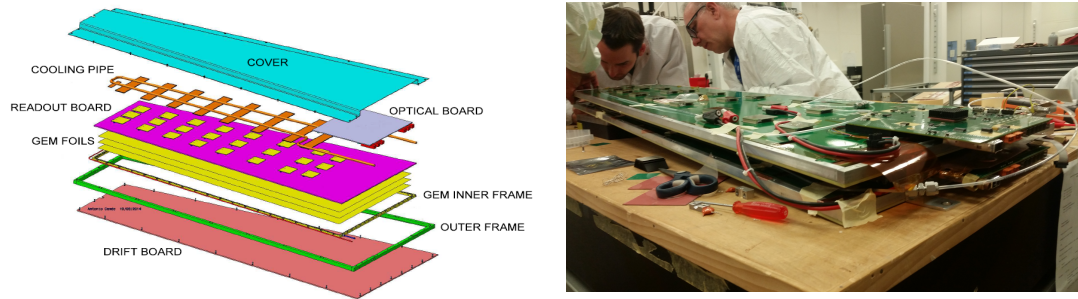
(Left) Triple-GEM chamber exploded view; (Right) fully-assembled superchamber in tracker integration facility
